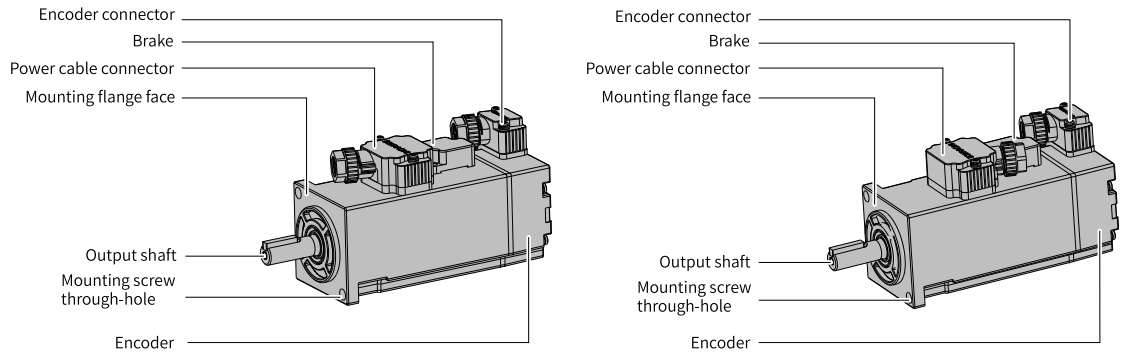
Components of a terminal-type servo motor (Left: motor with front cable outlet; Right: motor with rear cable outlet)
